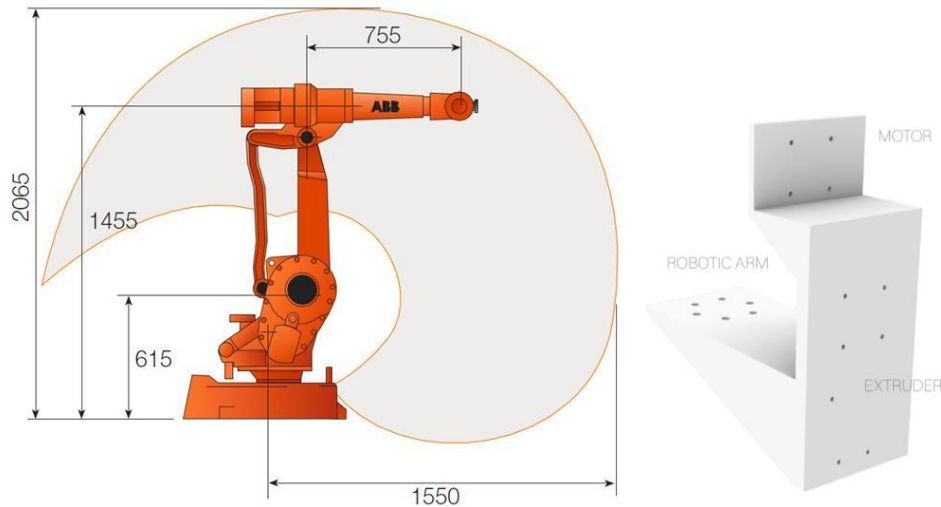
Left: Robotic Arm Dimensions Right: Bracket Design
